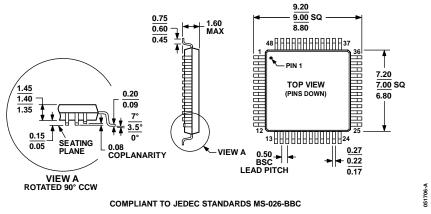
48-Lead Low Profile Quad Flat Package (LQFP) (ST-48) Dimensions shown in millimeters
